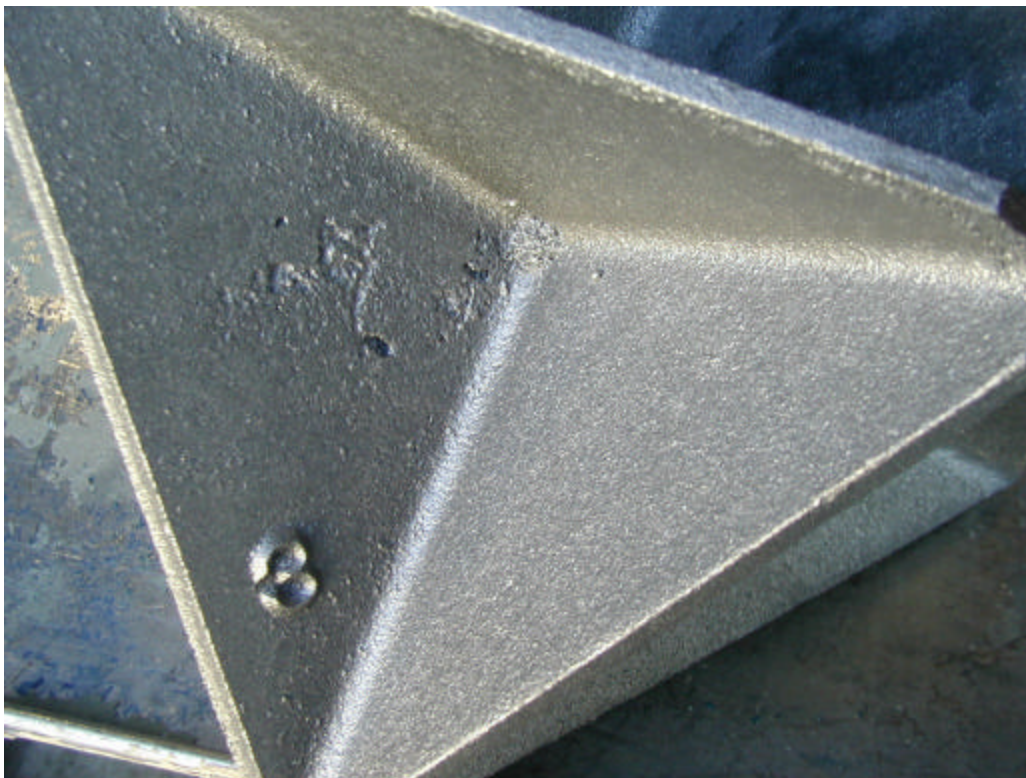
Mold FN007 cavity 3 casting ranked 8 of 9
